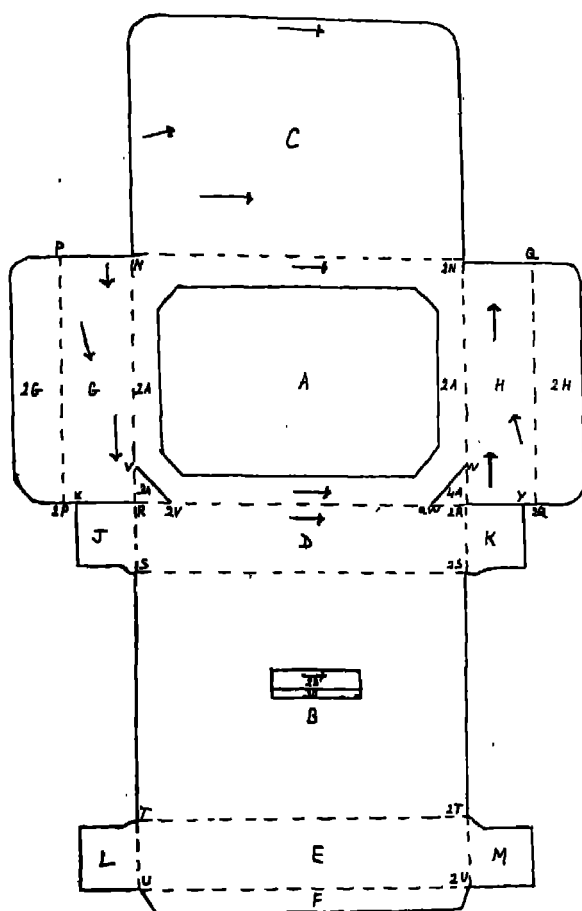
SINGLE-PIECE SAMPLES BOX OF TOILET TRADERS.
